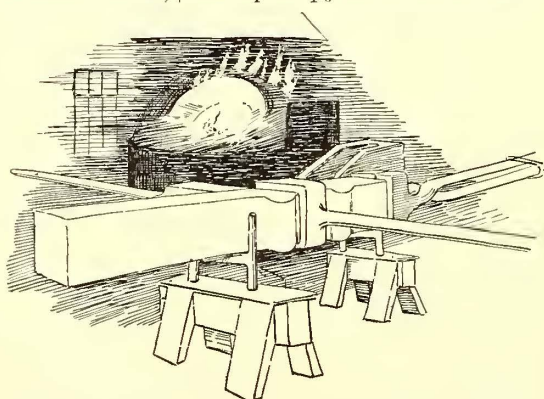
COKE FIRE ARCH FOR HEAVY FORGINGS.
